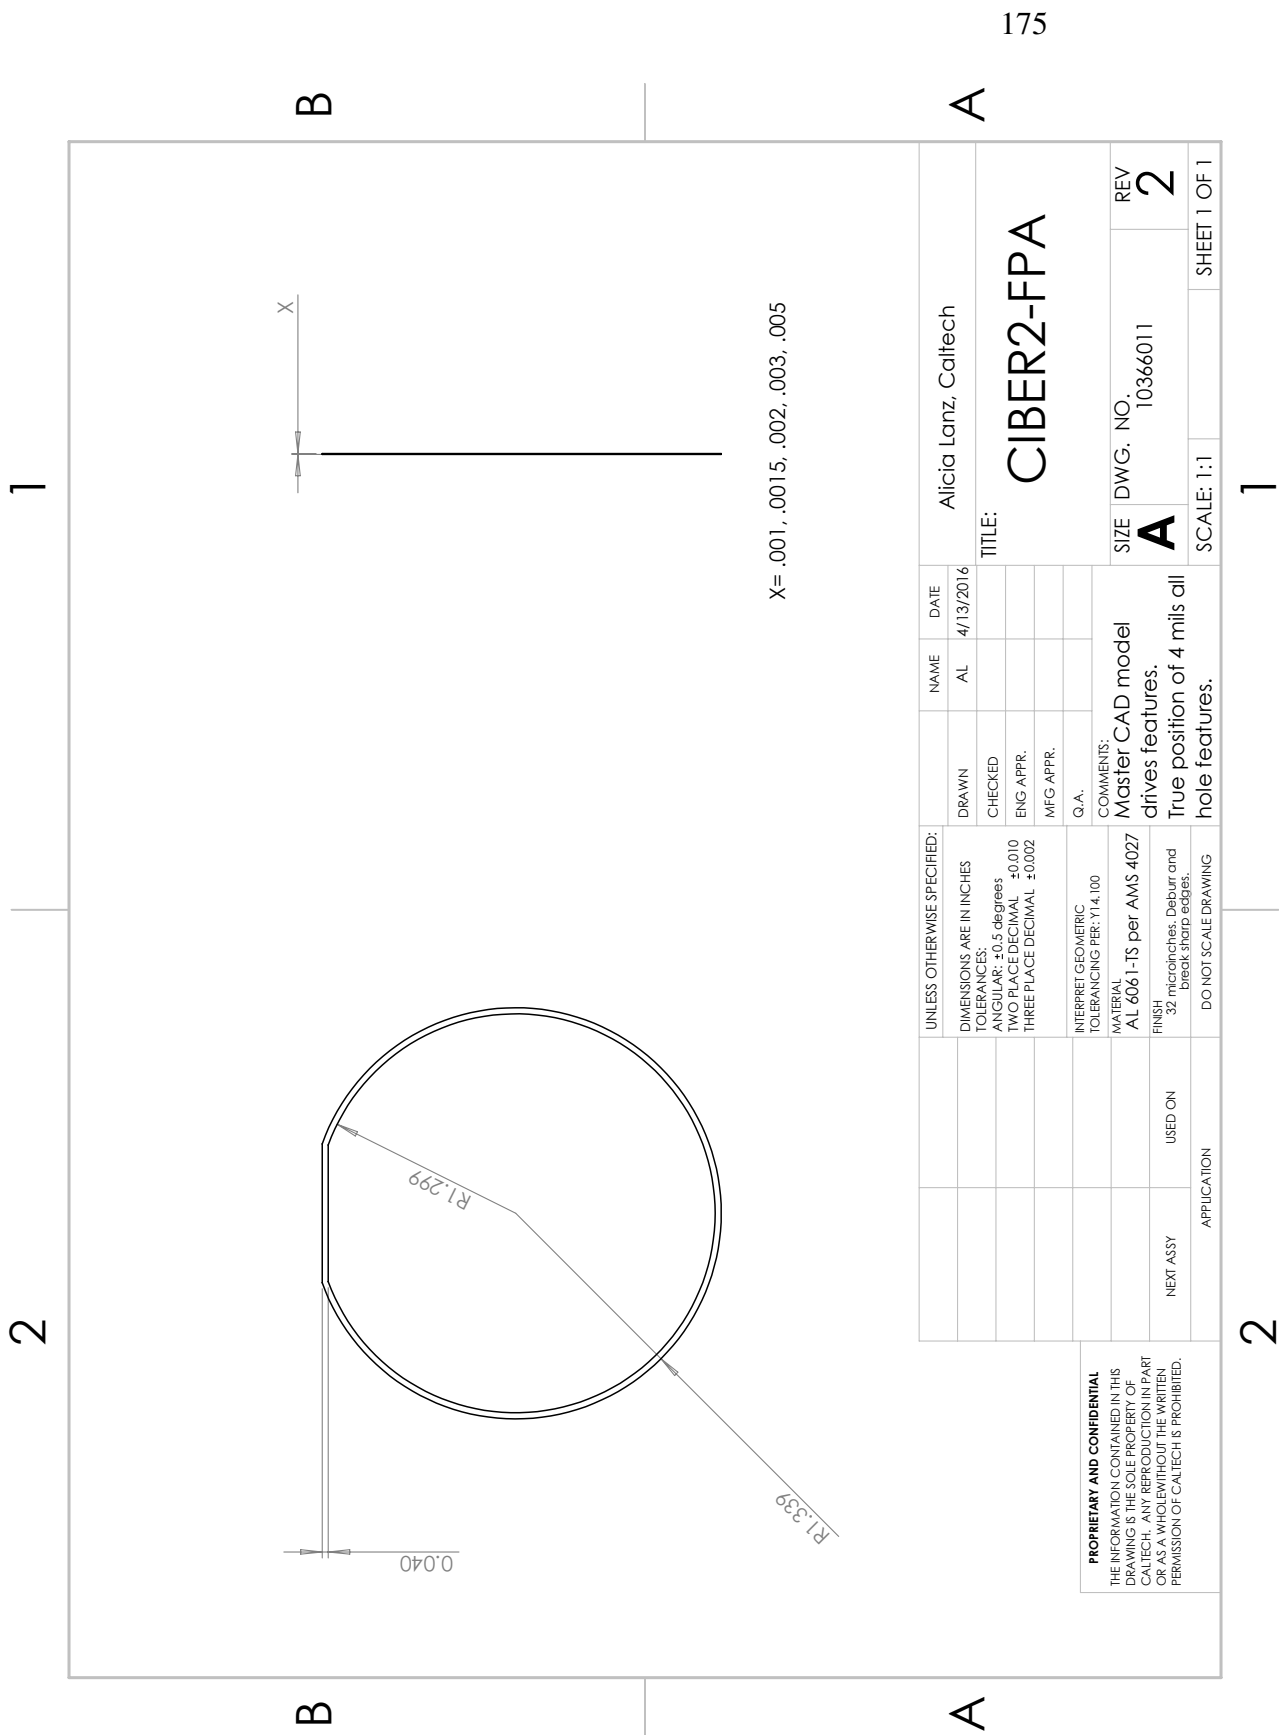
Mechanical drawing for flight version of the CIBER-2 focal plane assembly filter holder.
